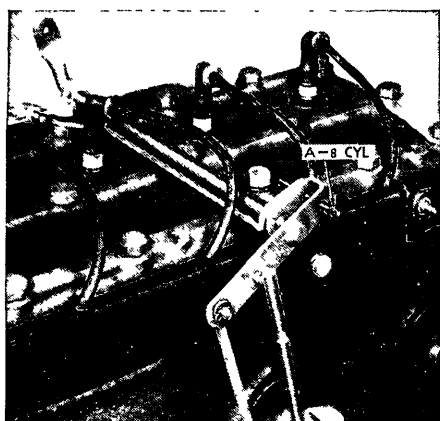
Adjusting pin installed at A on 8-cylinder 1948-49 Hydra-Matic
